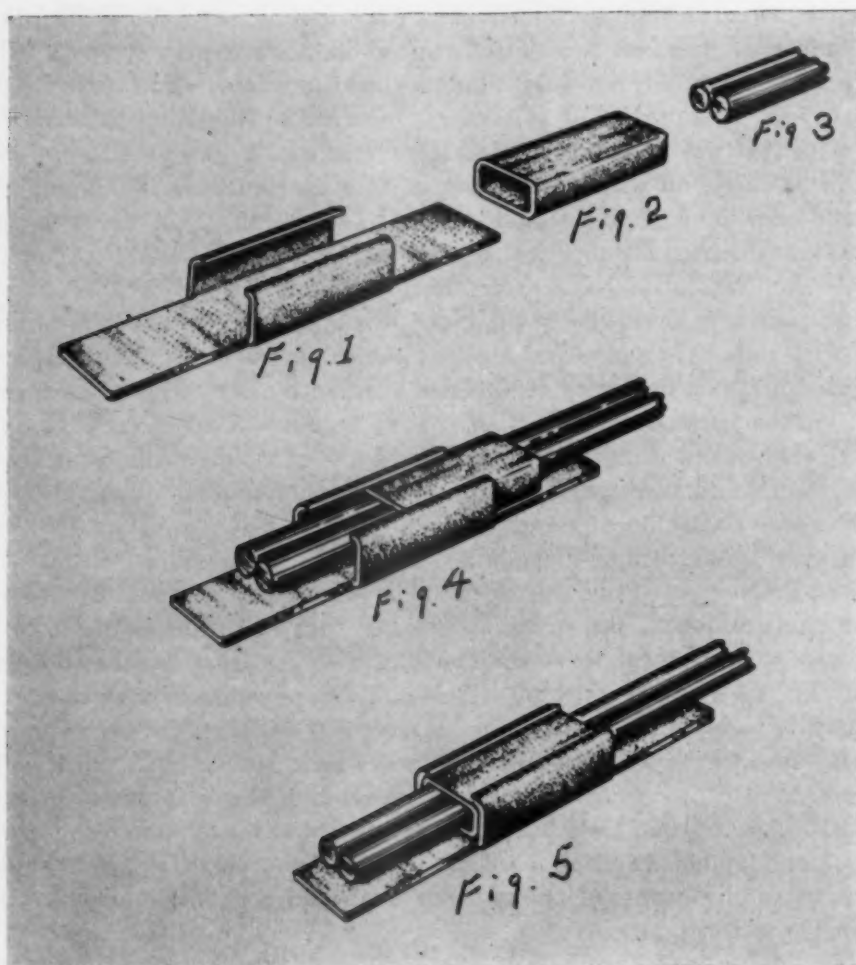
is a rectangular open tube with extended flanges for spot welding to chrome-nickel steel band material. The rectangular open tube is 0.019 inch by 0.030 inch inside diameter and 0.115 inch long. The open tube is made of chrome-nickel spring steel 0.006 inch thick, making the entire labiolingual thickness of this attachment 0.031 inch exclusive of band material.
